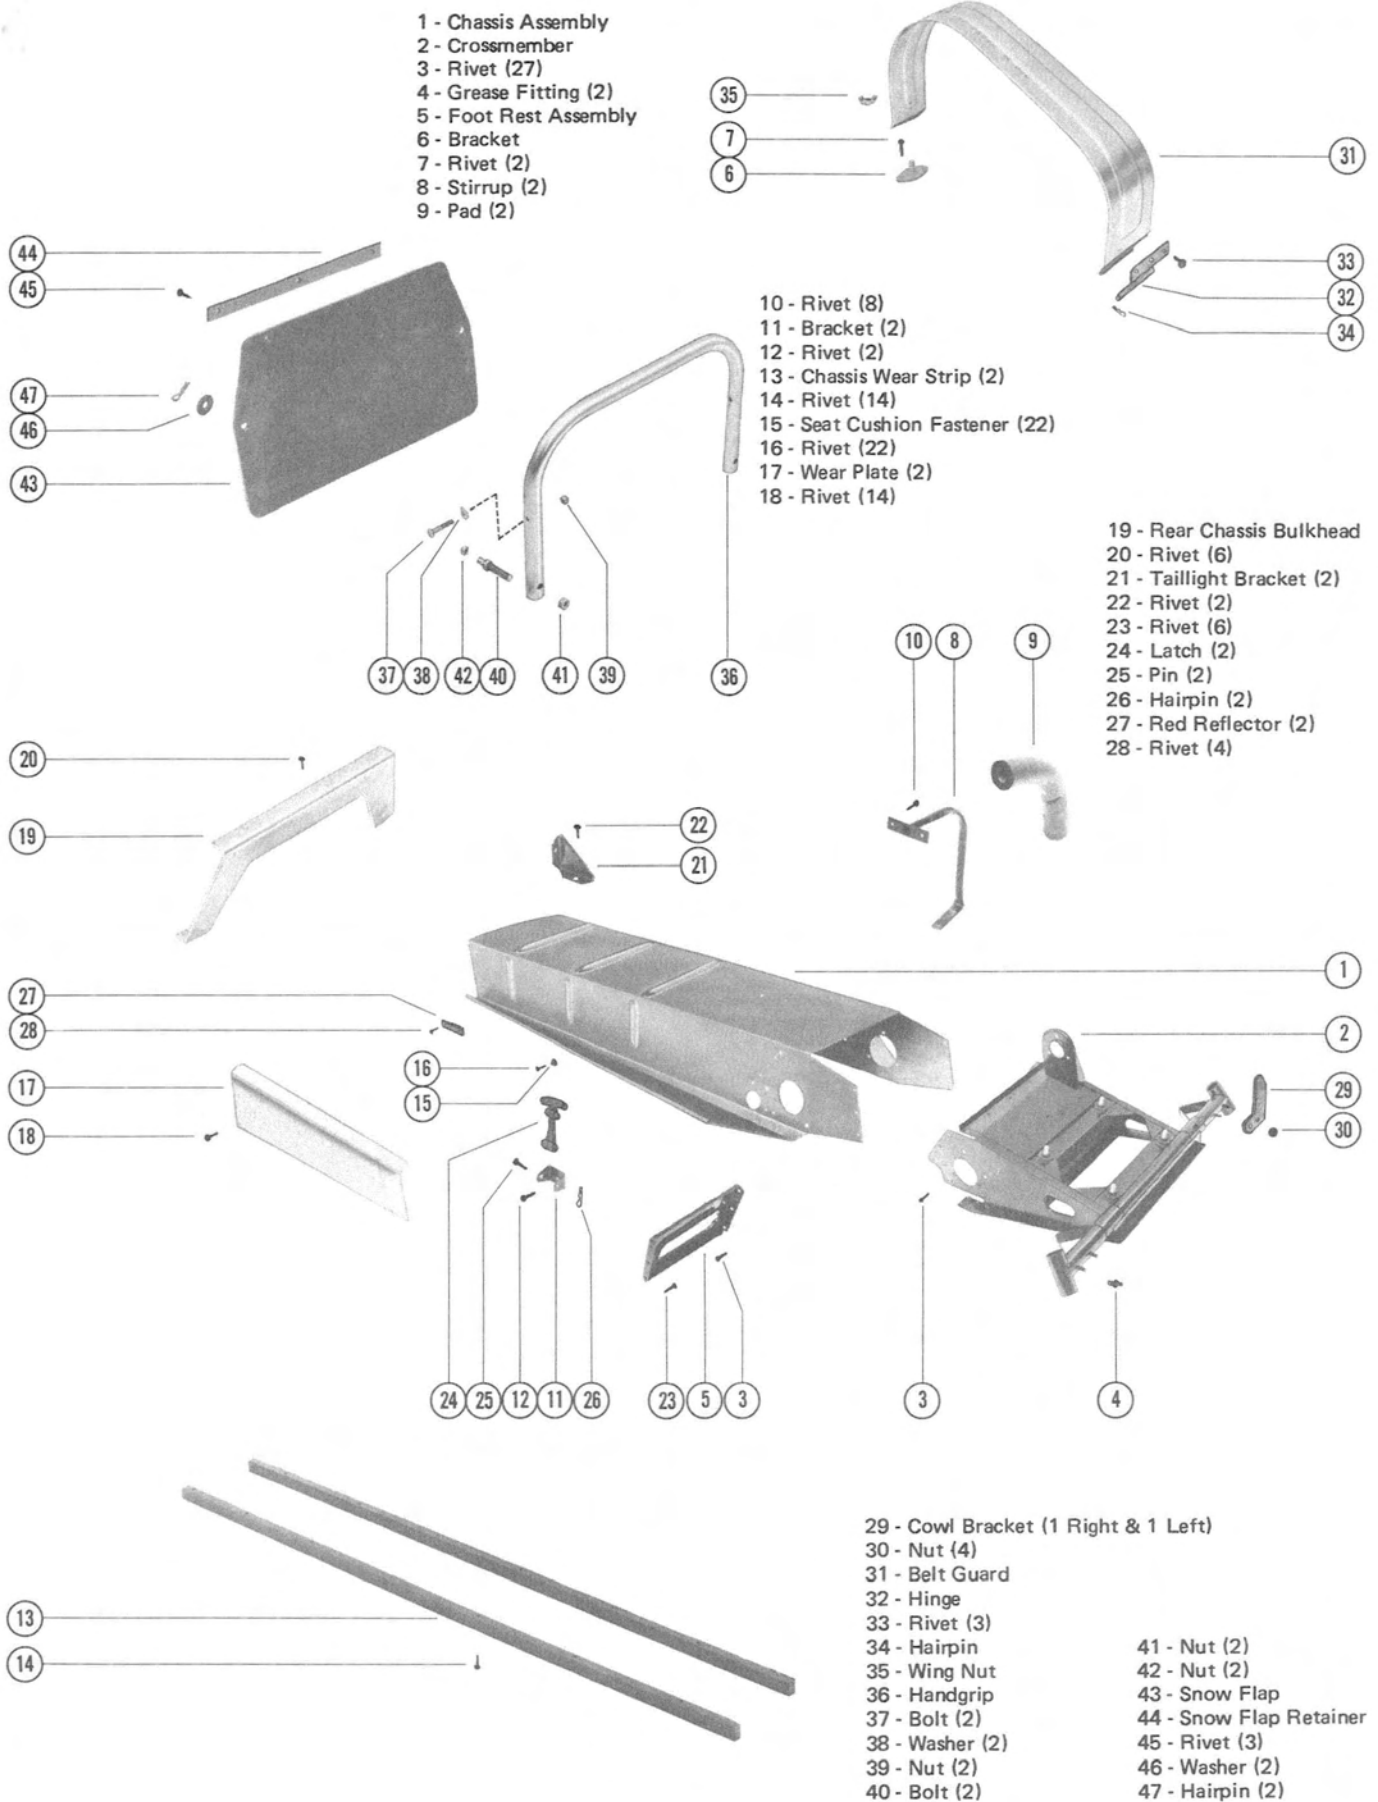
Exploded View - Sno-Twister (400-D) Chassis
